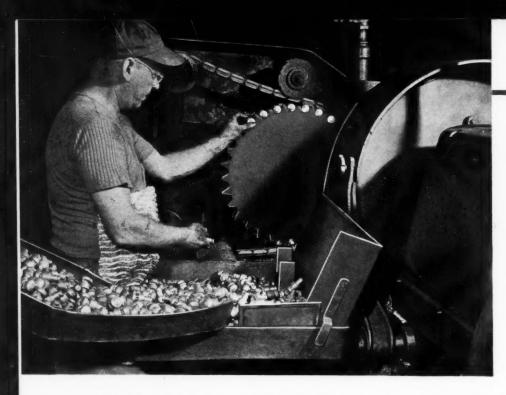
Cast Valve Guide Bushings are Ground to Length on a Double-spindle Disk Grinder. Special Hoppers are being Considered to Permit Automatic Loading of This Machine
